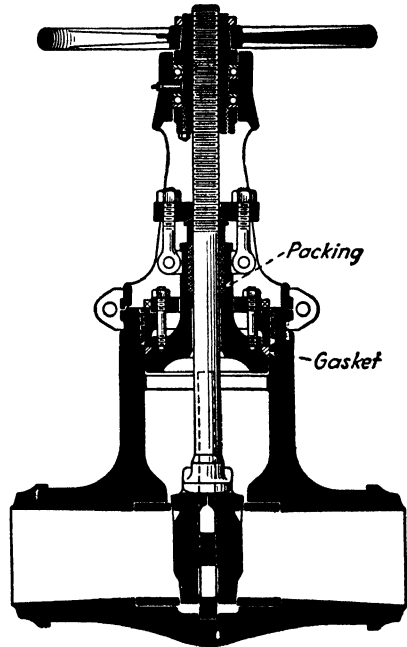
Pressure-seal bonnet gate valve with rising stem. (Courtesy of Crane Co.)
